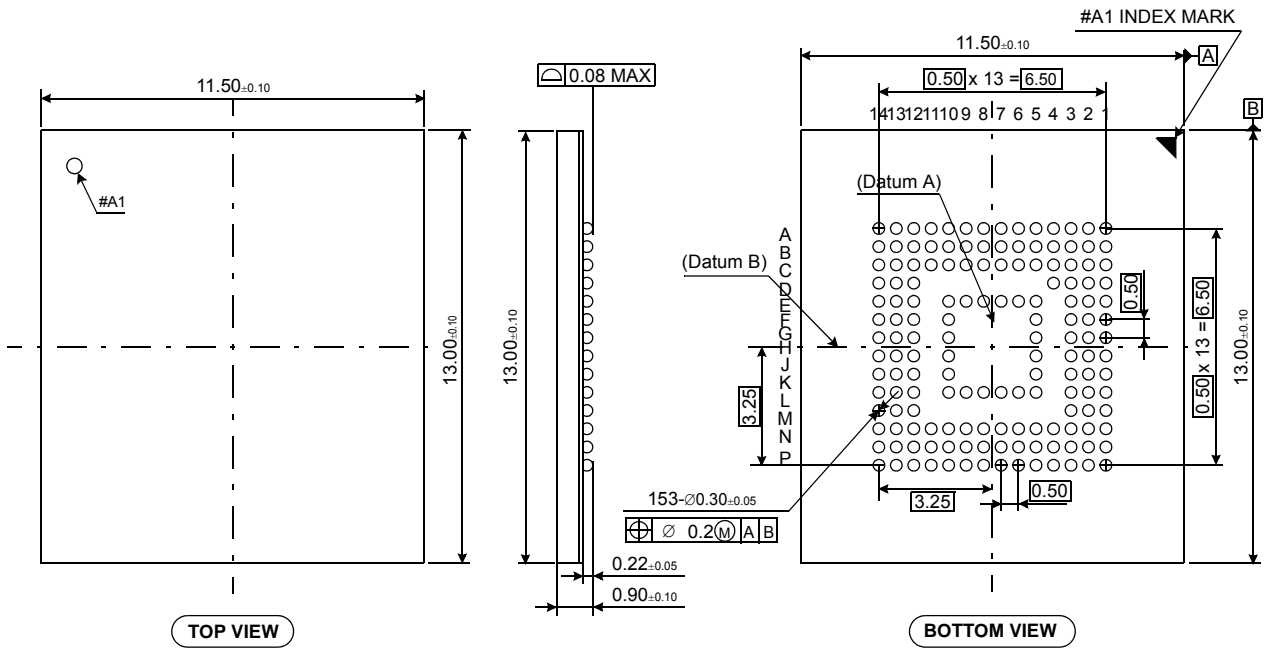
11.5mm x 13mm x 1.0mm Package Dimension
